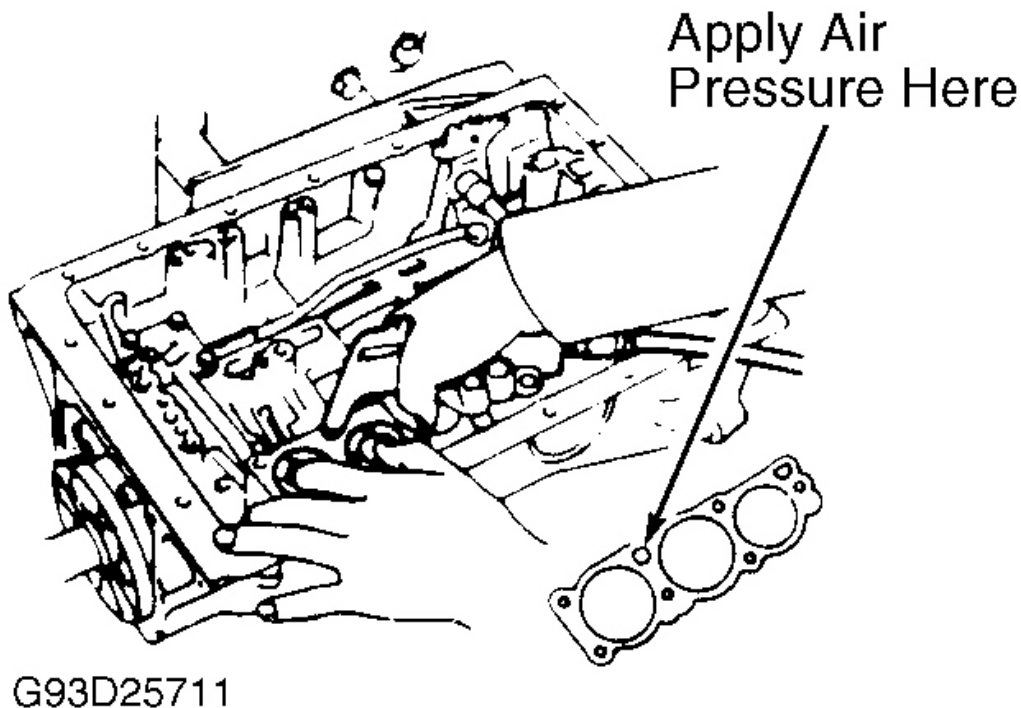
Removing 2nd Brake & Direct Clutch Accumulator Components
